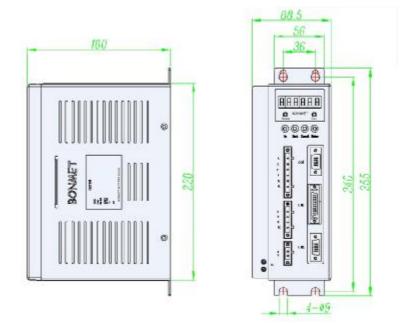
SA3L06B/SA3L10B dimension drawings
